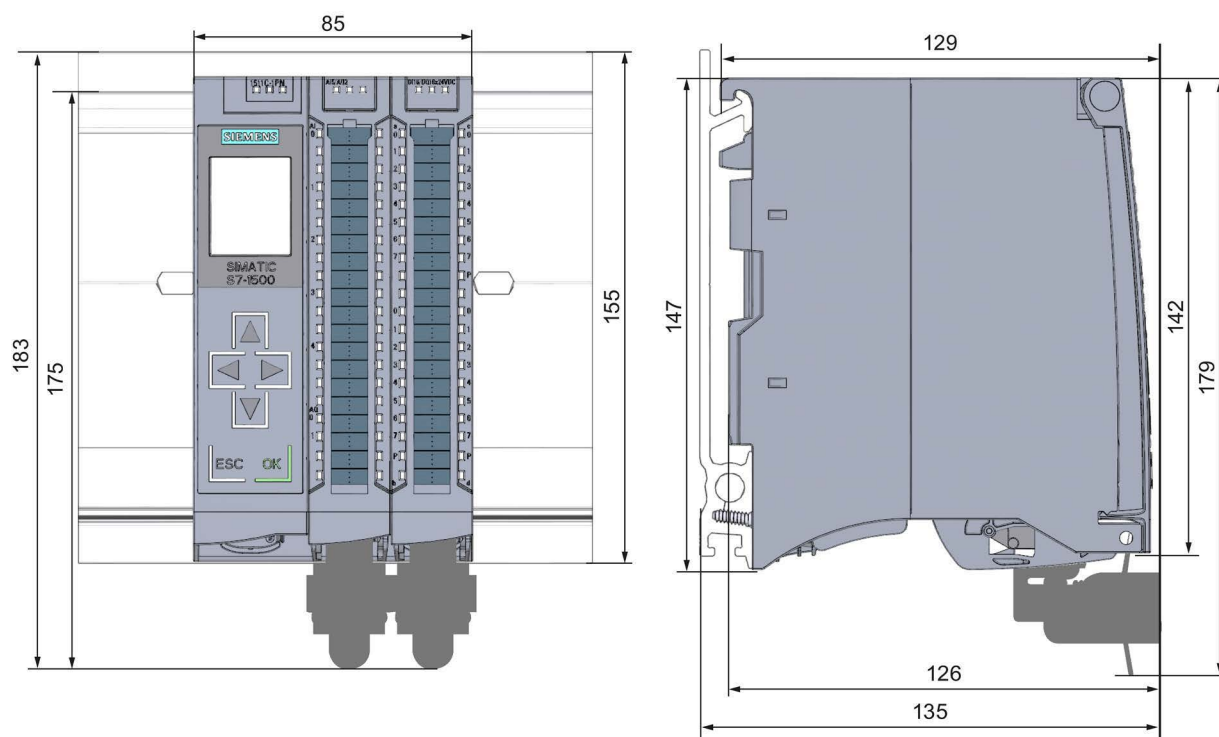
Dimension drawing of CPU 1511C-1 PN – front and side views
